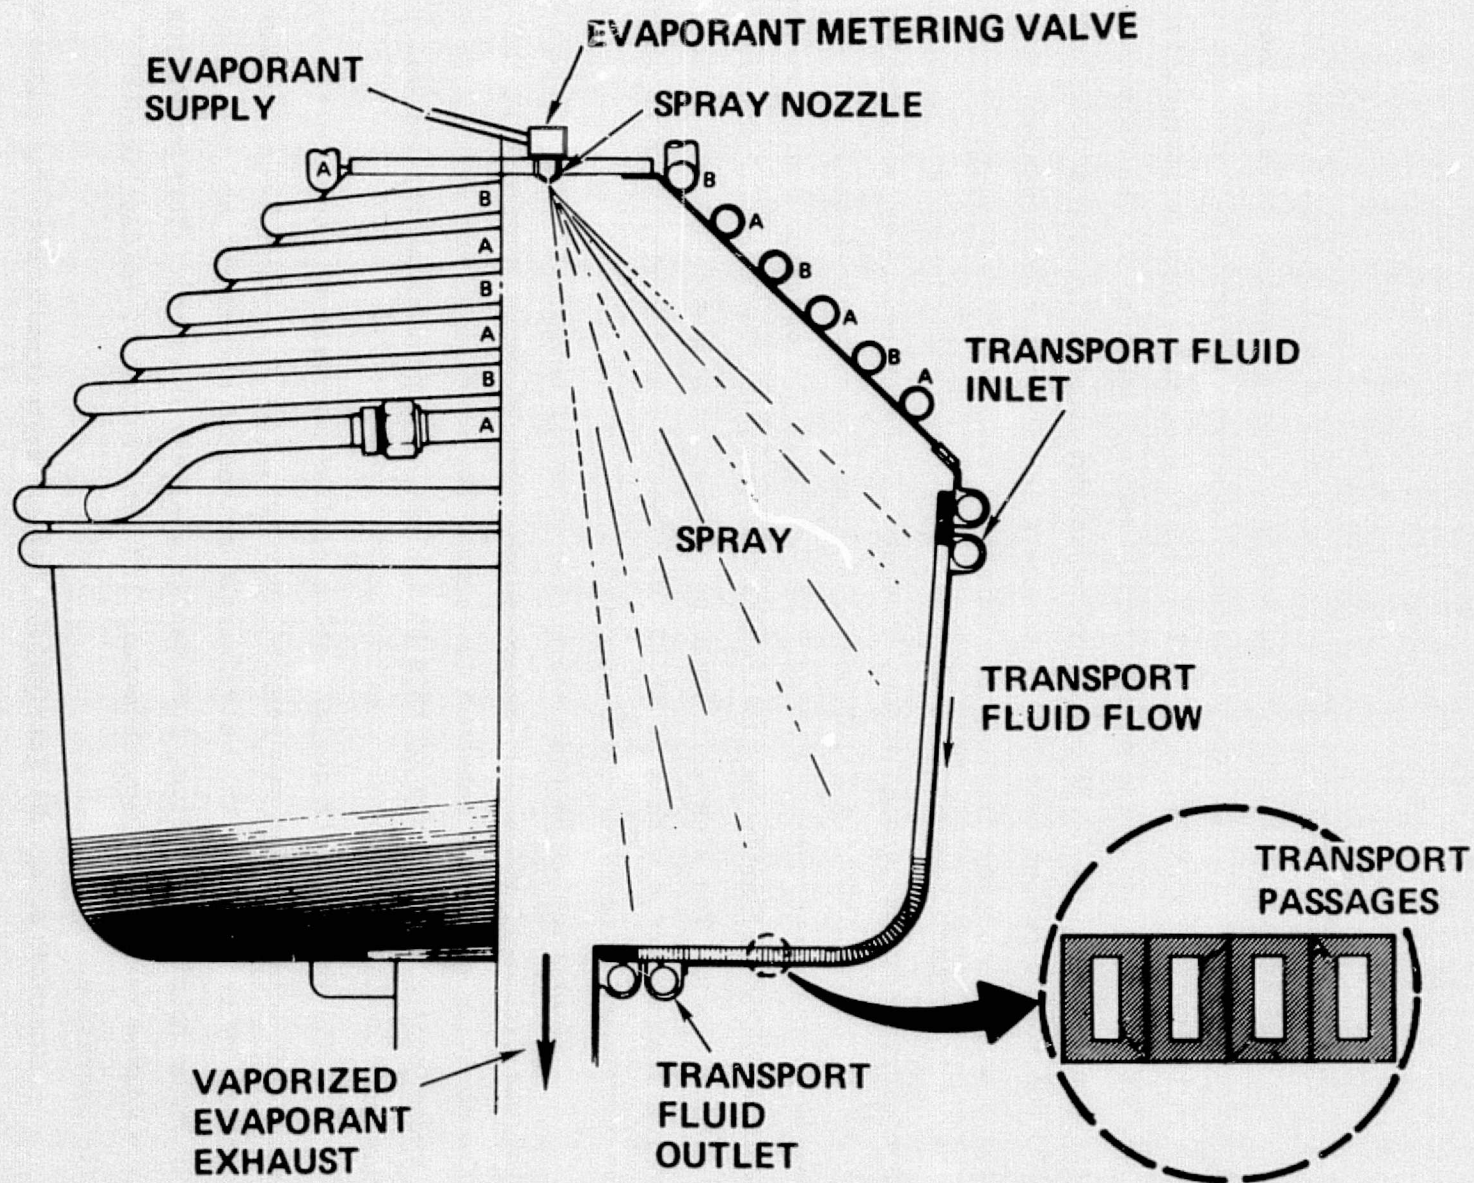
PROTOTYPE I FLASH EVAPORATOR
